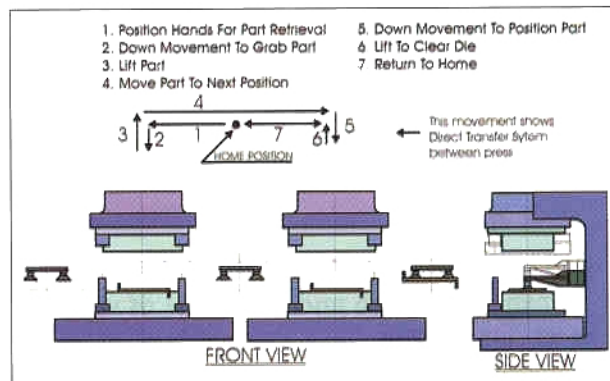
Clamps mounted on a single feed bar attach to the workpiece and convey it using vertical and level two-dimensional movement.
